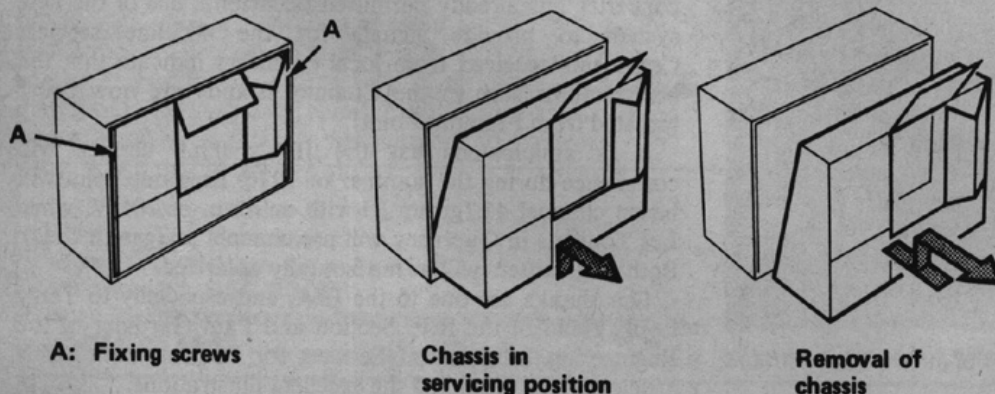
(left): Method of lowering and removing the chassis. The bottom of the chassis is supported on nylon rollers: make sure that they are in their runners before withdrawing the chassis too far – otherwise you could end up with a cracked c.r.t. neck.
